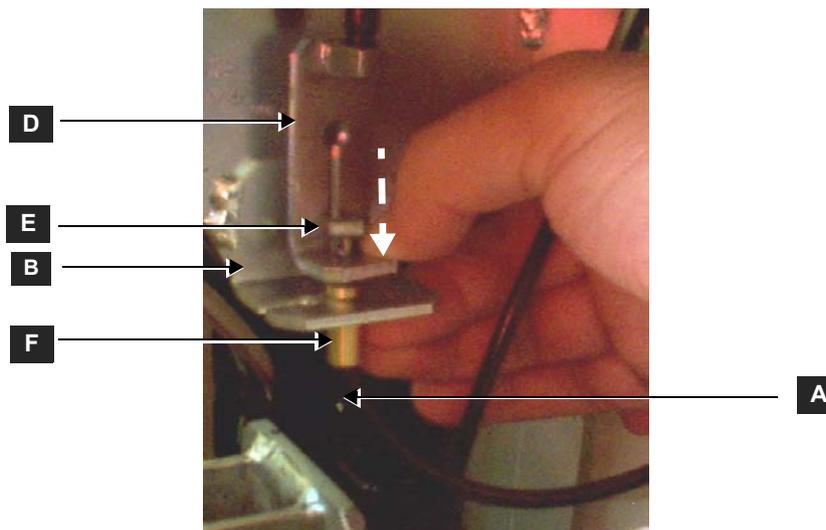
Releasing the Cable End Stopper from the Tensioning Plate
